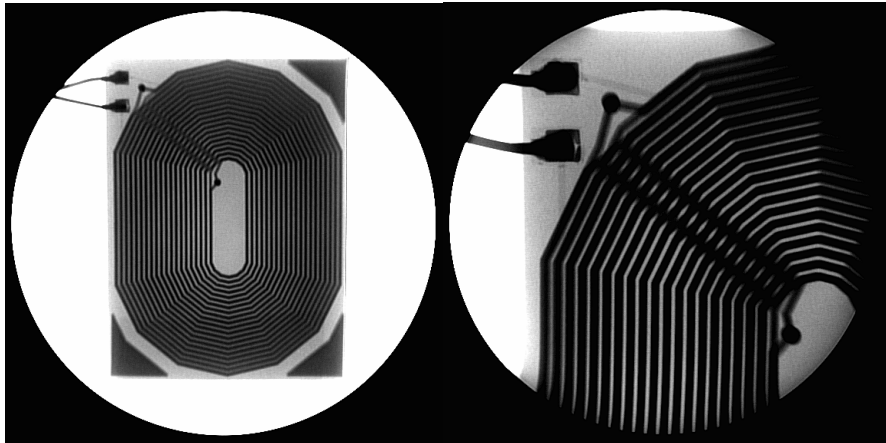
x-ray picture of 30-layer LTCC sensor showing the actual layout of conductor connections (detail of the pad connection on the right)
